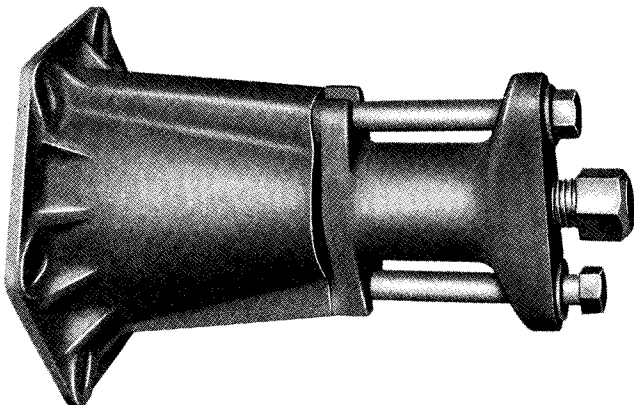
Combination Pulley, Bearing and Head Puller No. 312755
